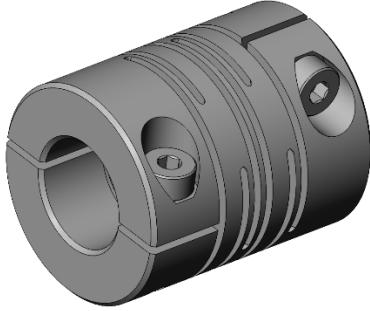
8 mm to 5 mm parallel cut clamping precision flexible shaft coupling, McMaster-Carr Part No. 8011N233, used to connect the NEMA 17 stepper motor used to drive the conveyor belt to the drive roller rod in the conveyor belt assembly. Part is rendered in SolidWorks, model courtesy of the McMaster-Carr website [20].
